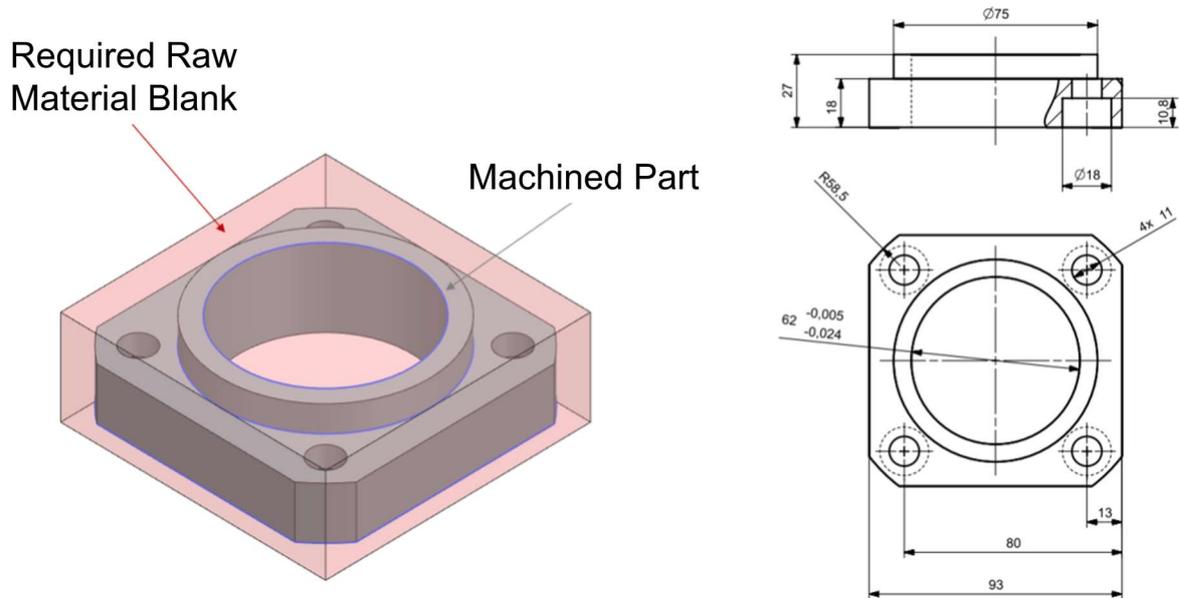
Case study - Hiwin FF 30 based bearing housing and CNC milling assembly.
